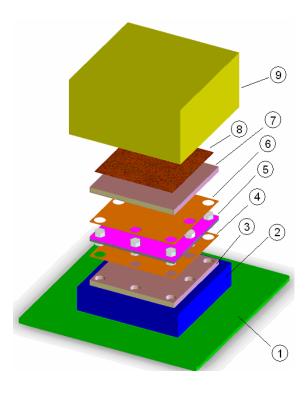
The proposed configuration for measurement of thermal conductance of bolted assemblies
